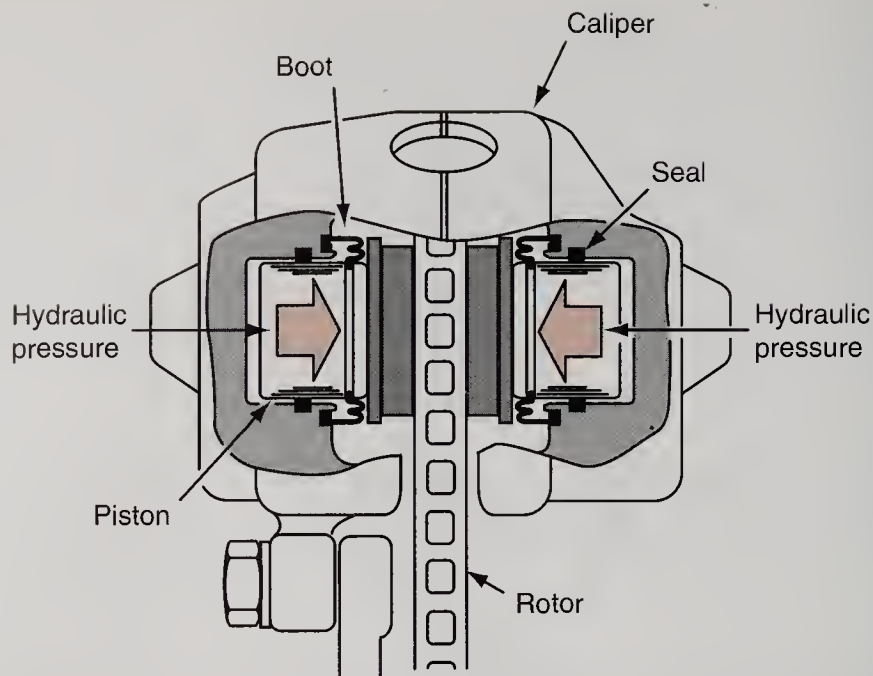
Equal hydraulic pressure on both sides of a fixed caliper applies equal force to the inboard and outboard pistons.
